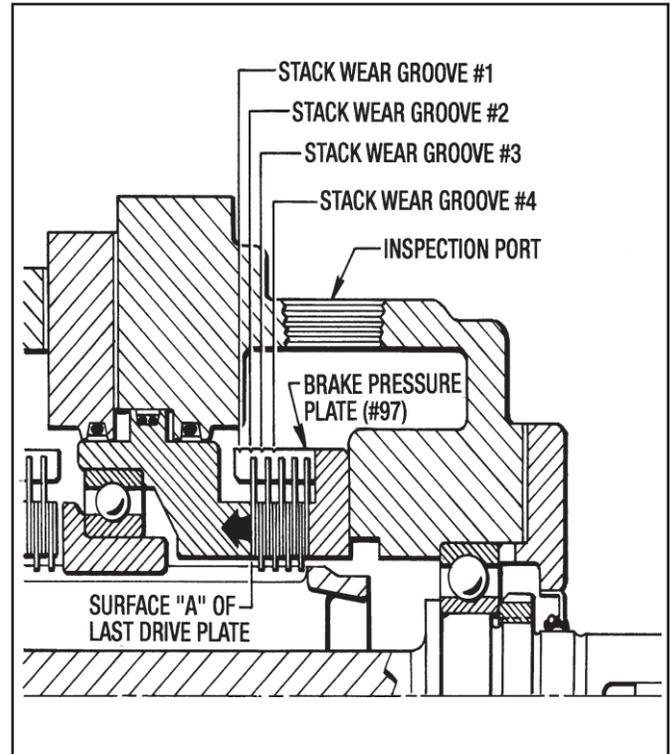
Checking Clutch and Brake Stacks for Wear
